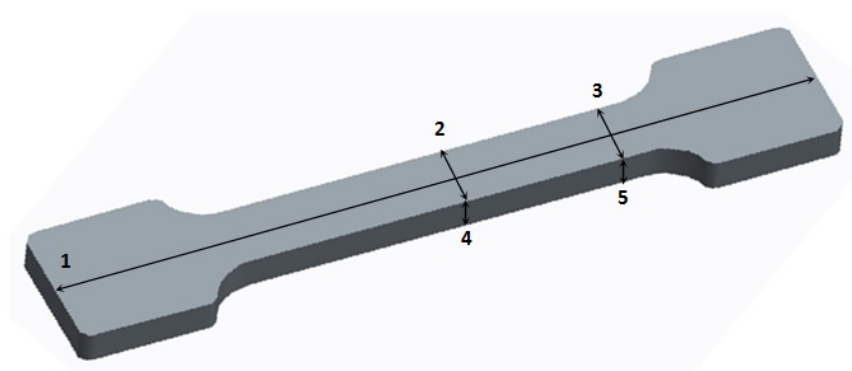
Location of measurements of tensile specimen dimensions - Specimen dimensions measured in the highlighted locations using vernier callipers to ensure consistency and adherence to the ASTM standard.
